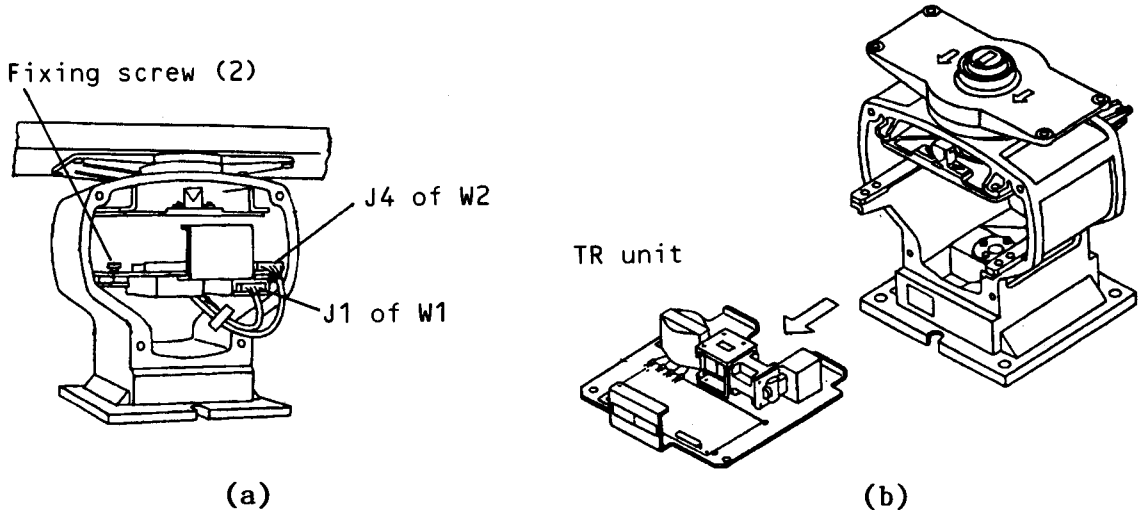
Dismounting Transmitter/Receiver (TR) Unit
